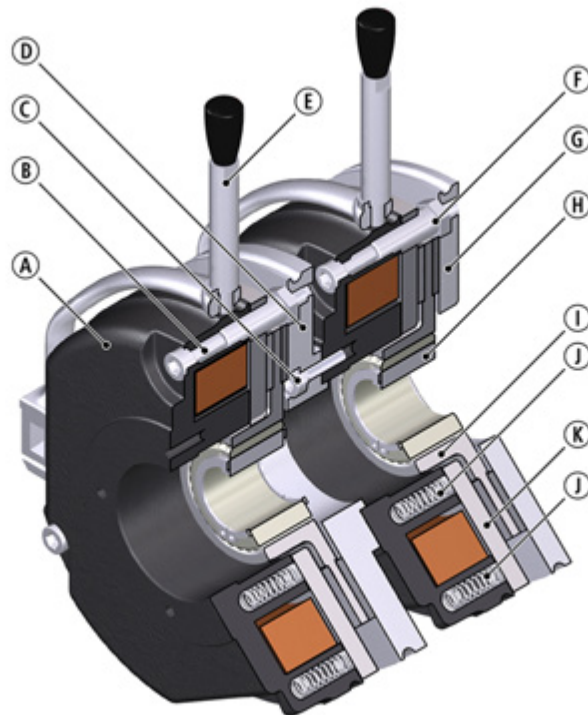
Design of the INTORQ BFK458 spring-applied brake: Basic module N, doubled design with intermediate flange
